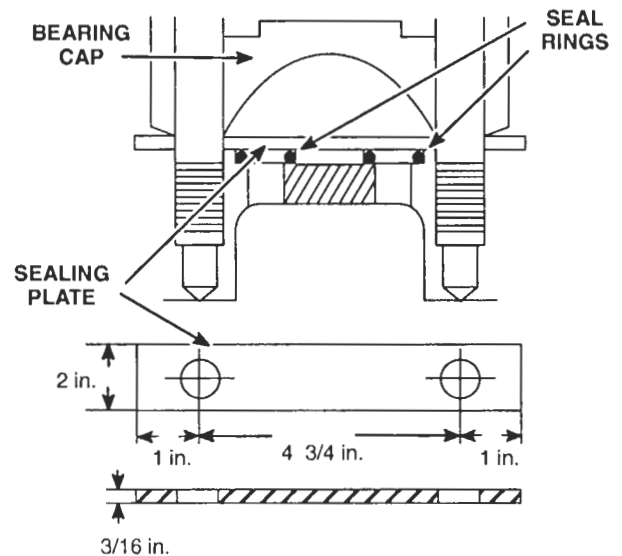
Sealing Plate Details for Pressure Testing Cylinder Block
